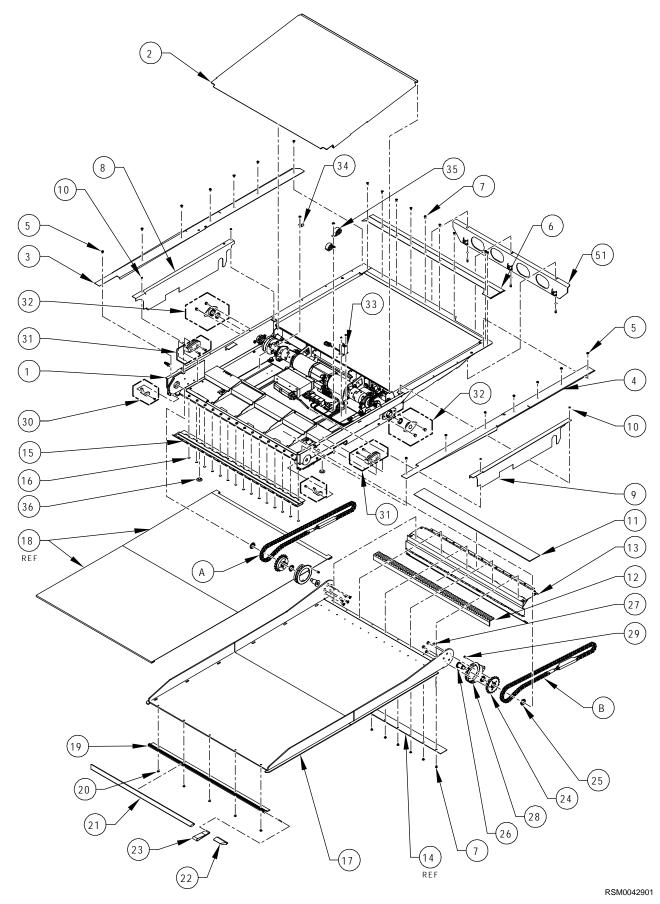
621R-SERIES RAMP ASSEMBLY (SHEET 1 OF 2)
